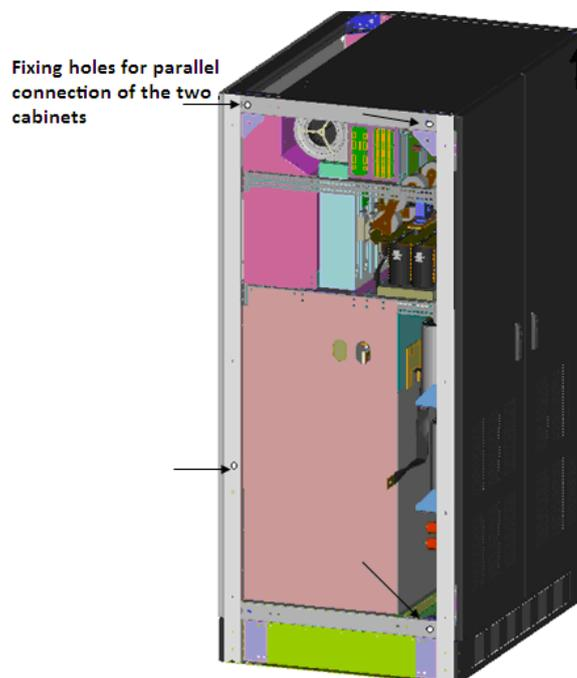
Diagram of fixed holes on the rectifier cabinet and the inverter cabinet of This series (400-500kVA) UPS
